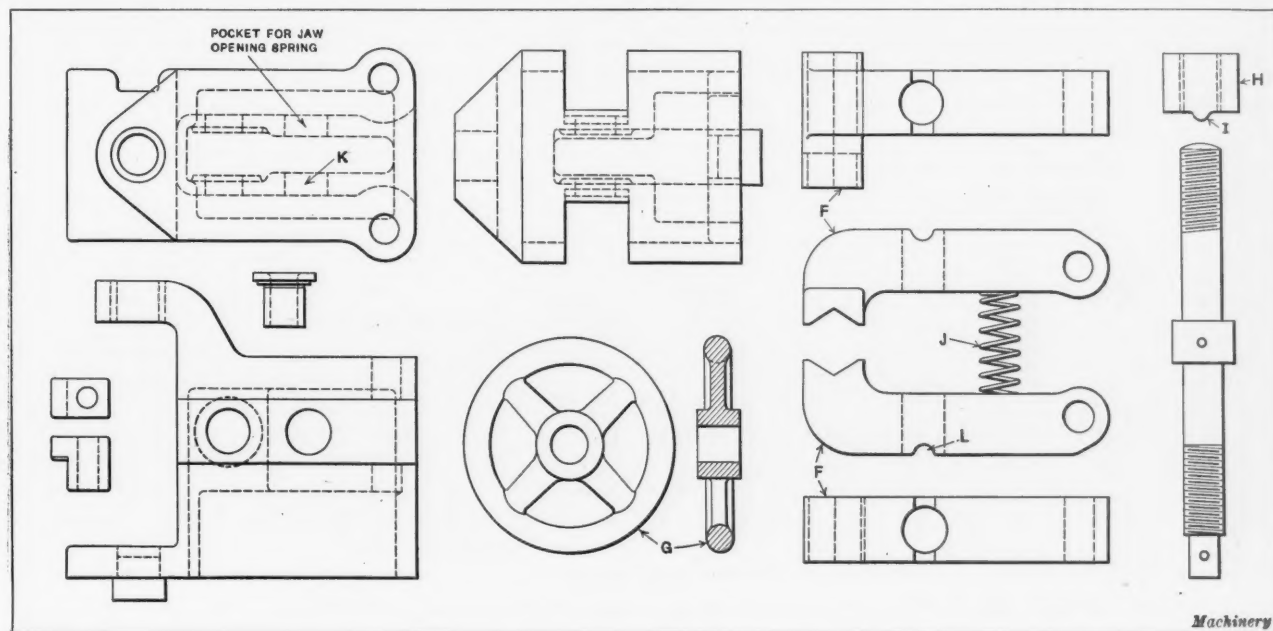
Details of the Interchangeable Work-holding Fixtures used on Machines shown in Figs. 1 and 2
